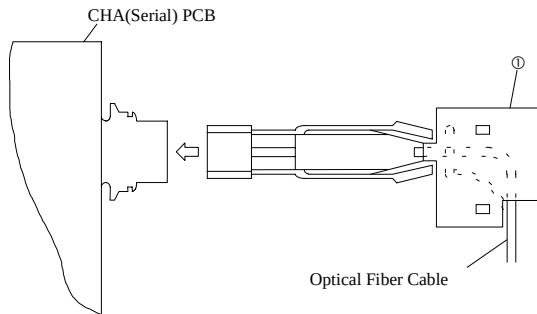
Connection of Optical Fiber Cable
